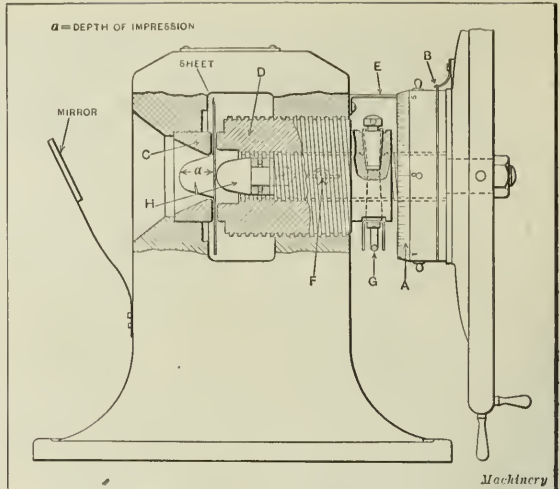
Partial Cross-sectional View of Machine, showing Arrangement of Die, Tool and Holder in which Specimen is secured
